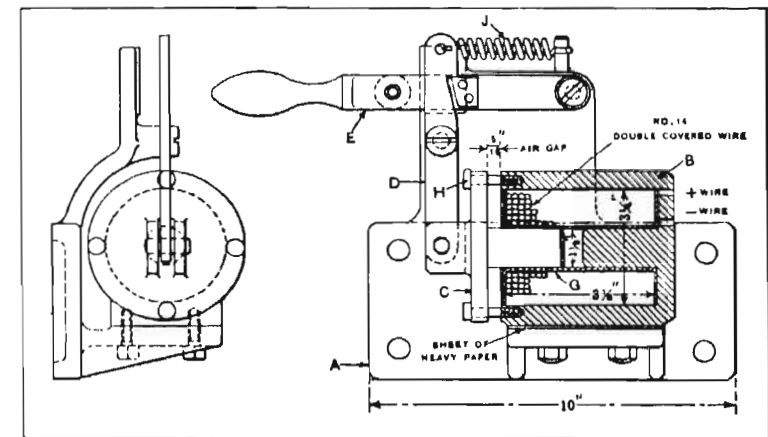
End and Cross-sectional Views of Electromagnetic Controller
